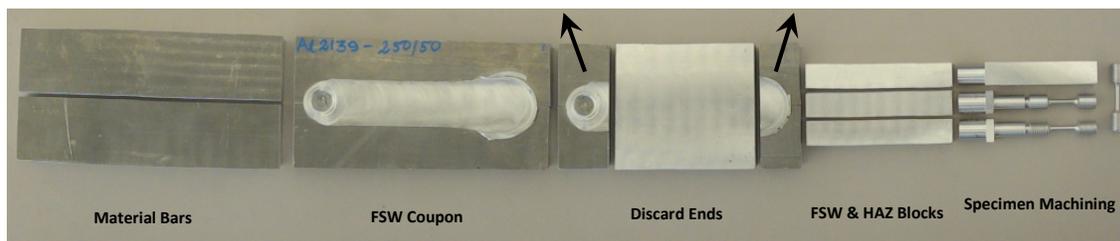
Specimen Manufacturing - Material Stock Thru Final Machining
